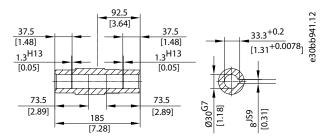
Steel/Stainless Steel 30 mm Shaft
